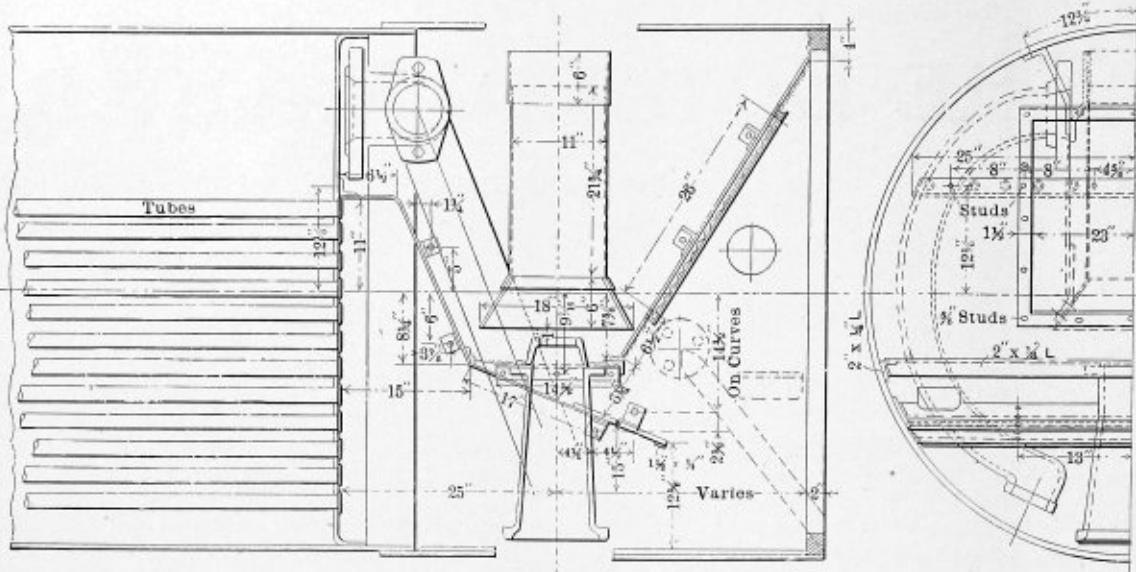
LONGITUDINAL AND CROSS-SECTIONS THROUGH SMOKE-BOX OF A 60-INCH LOCOMOTIVE BOILER.
